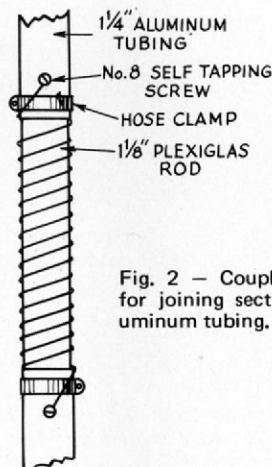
Coupling details for joining sections of aluminum tubing.
